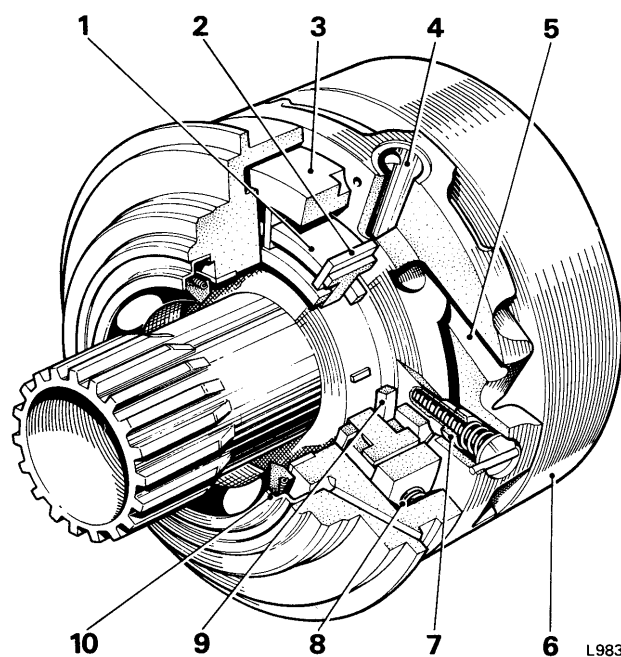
FRONT PUMP AND DRIVE-SHAFT
